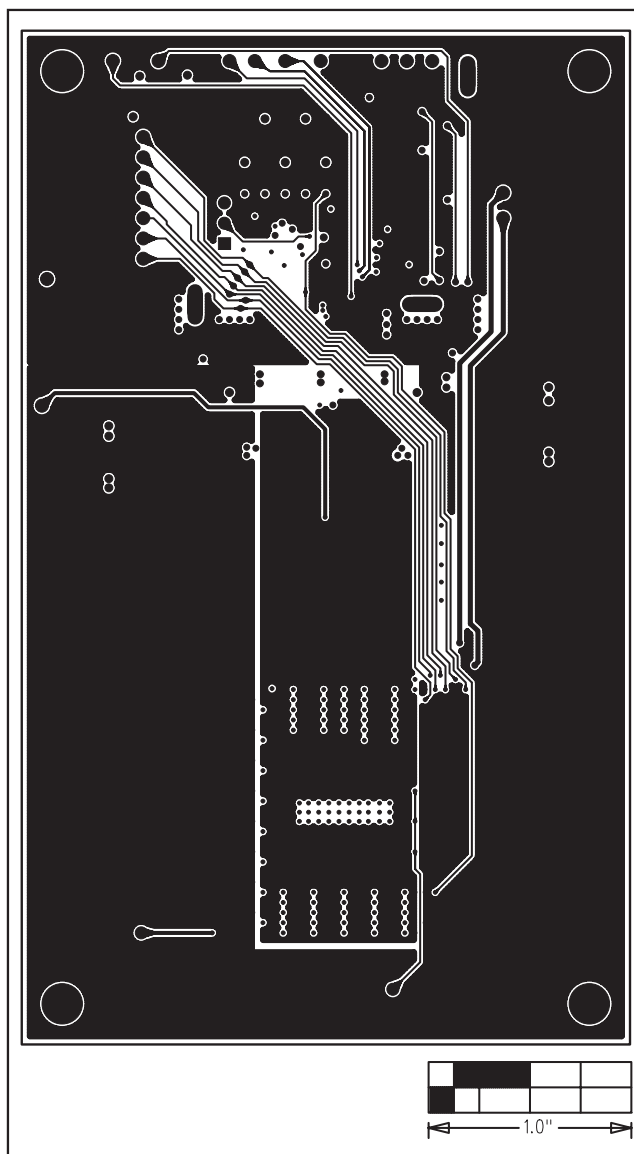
MAX17021 EV Kit PCB Layout—Internal Layer 3 (Signal Layer)
